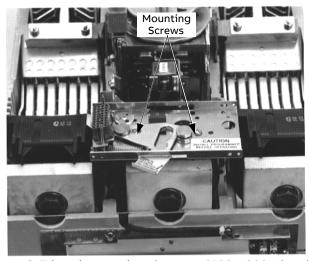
Trip unit mounting plate on a 2500–4000 A breaker.
